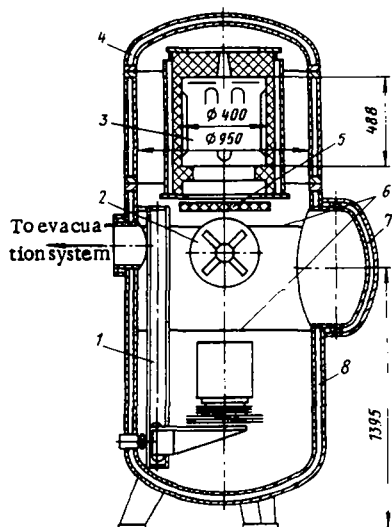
SEV-3.3/11.5FM2 electric vacuum elevator furnace. 1) Mechanism for transferring the batch; 2) fan; 3) heating chamber; 4) upper door; 5) blinds; 6) screens; 7) side door; 8) frame.
